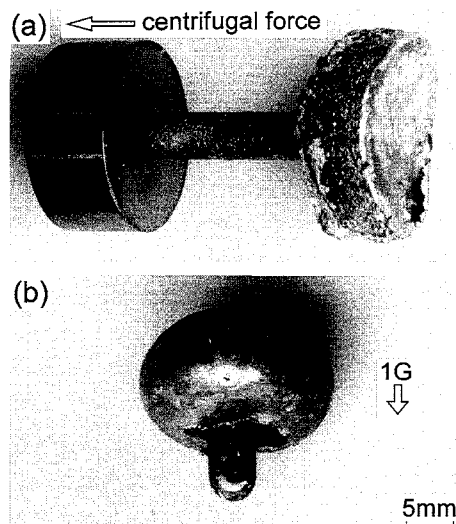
Specimens produced by using a mold with a slender cavity (5 mm diameter). (a) Specimen produced by centrifugal combustion synthesis. (b) Specimen produced under 1 G (Ni-Al alloy that did not flow into the mold cavity).
